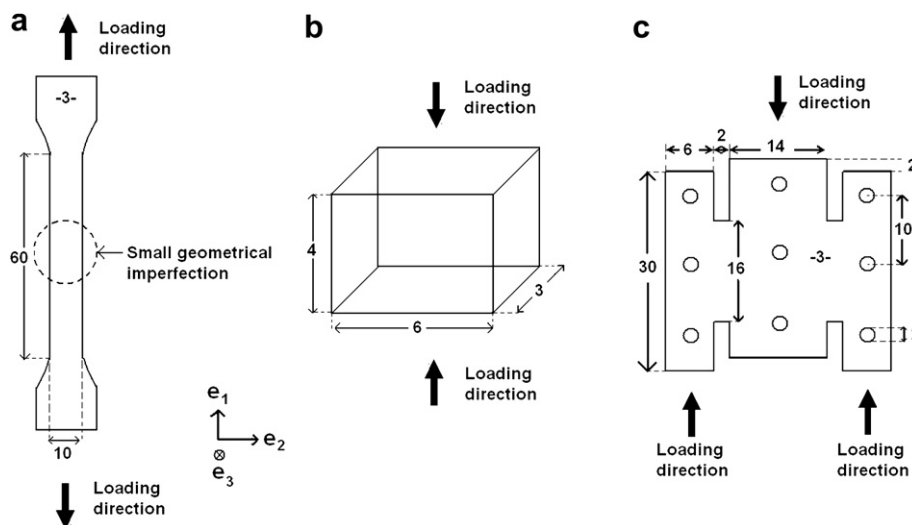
Geometry of the specimens used to characterise the material: (a) tension specimen, (b) compression specimen, and (c) shear specimen. Note that the scale differs between the three parts of the figure.
